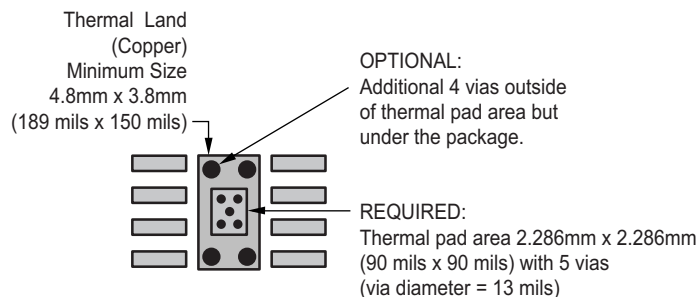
8-Pin PowerPAD PCB Etch and Via Pattern
